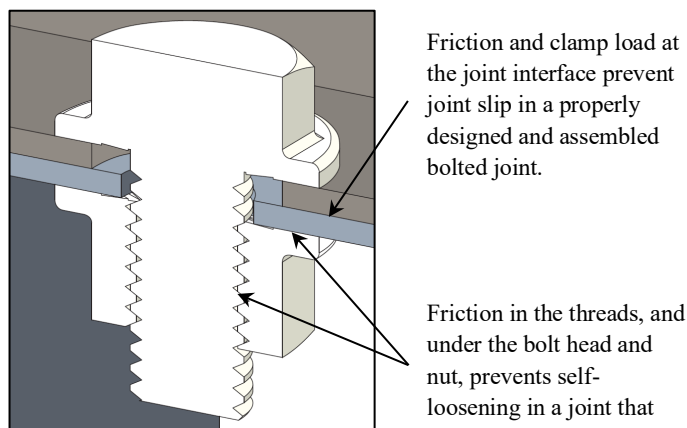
Friction within the solar PV bolted joint prevents joint slip and the resulting self-loosening in a properly designed and assembled bolted joint.
